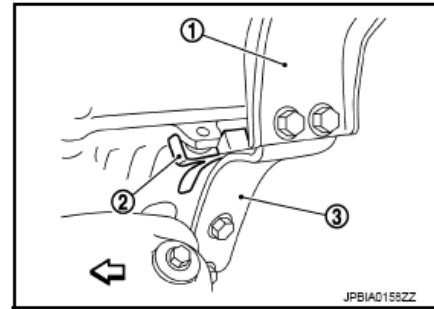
Identifying Spacer, Engine Rear Upper And Lower Slinger
